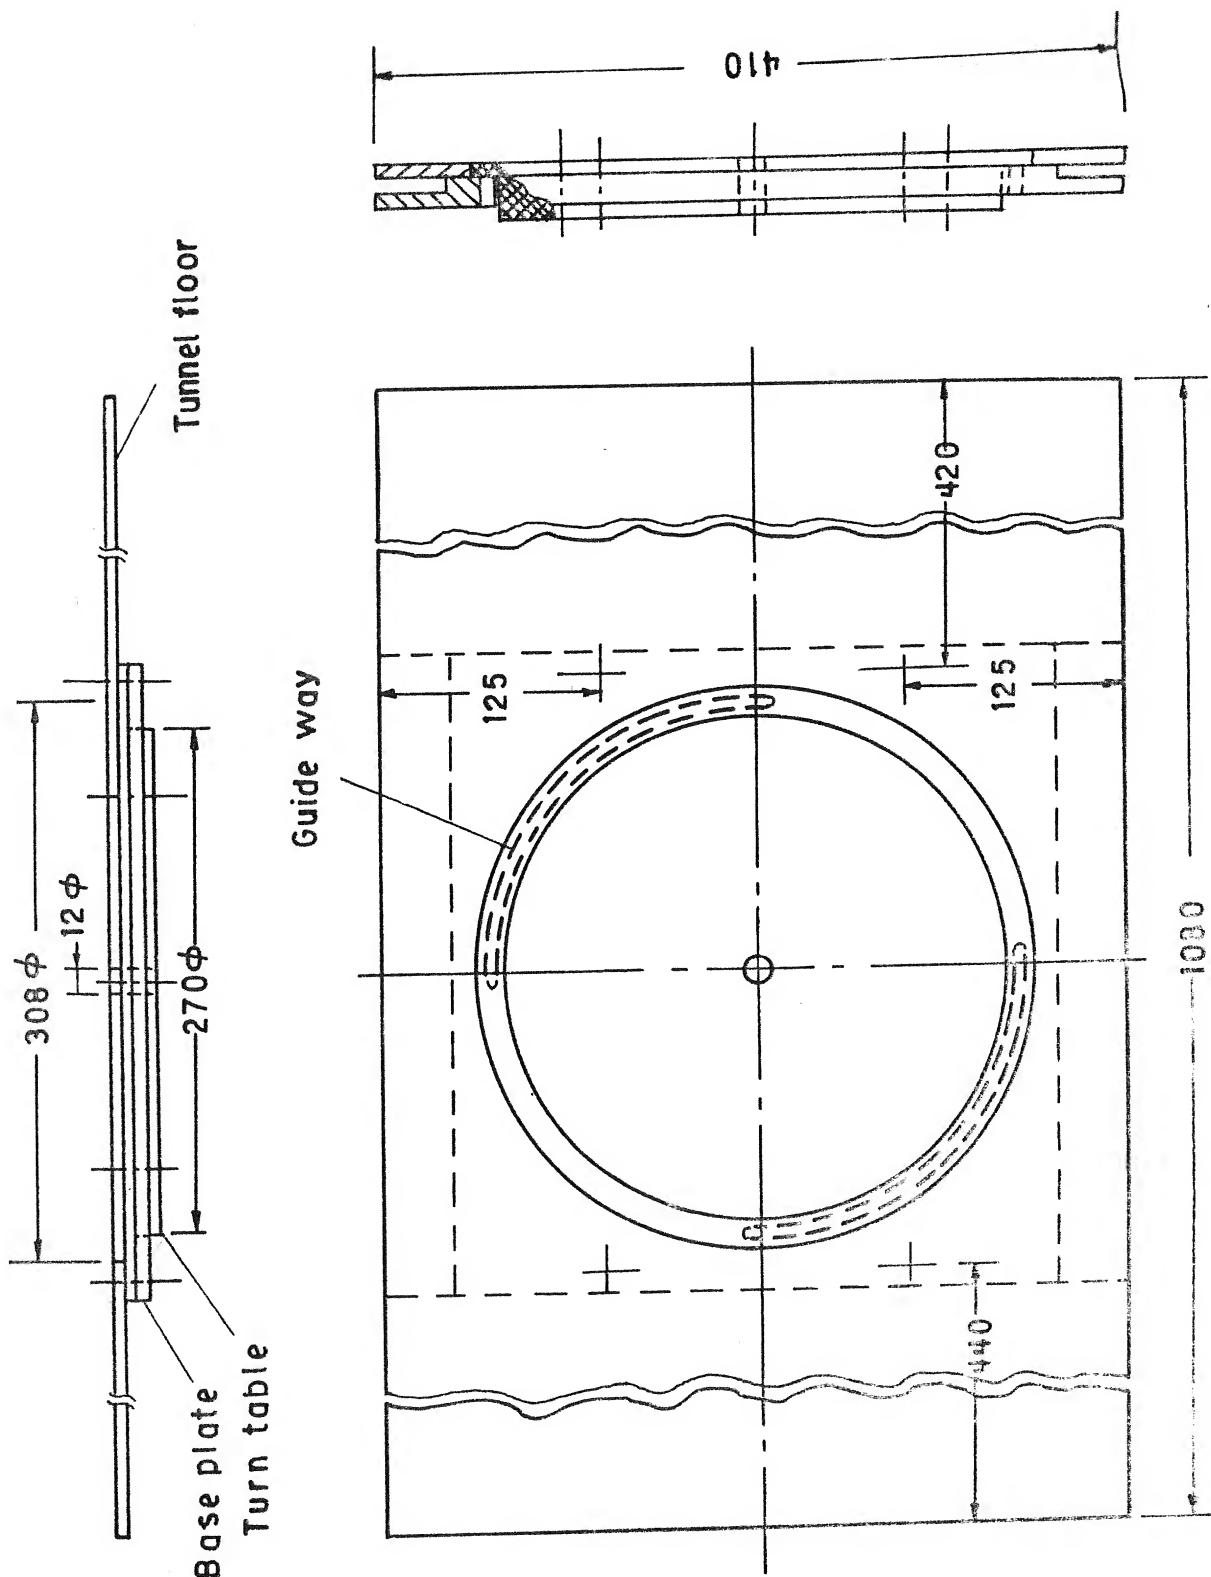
TURN TABLE CUM FLOOR ASSEMBLY
